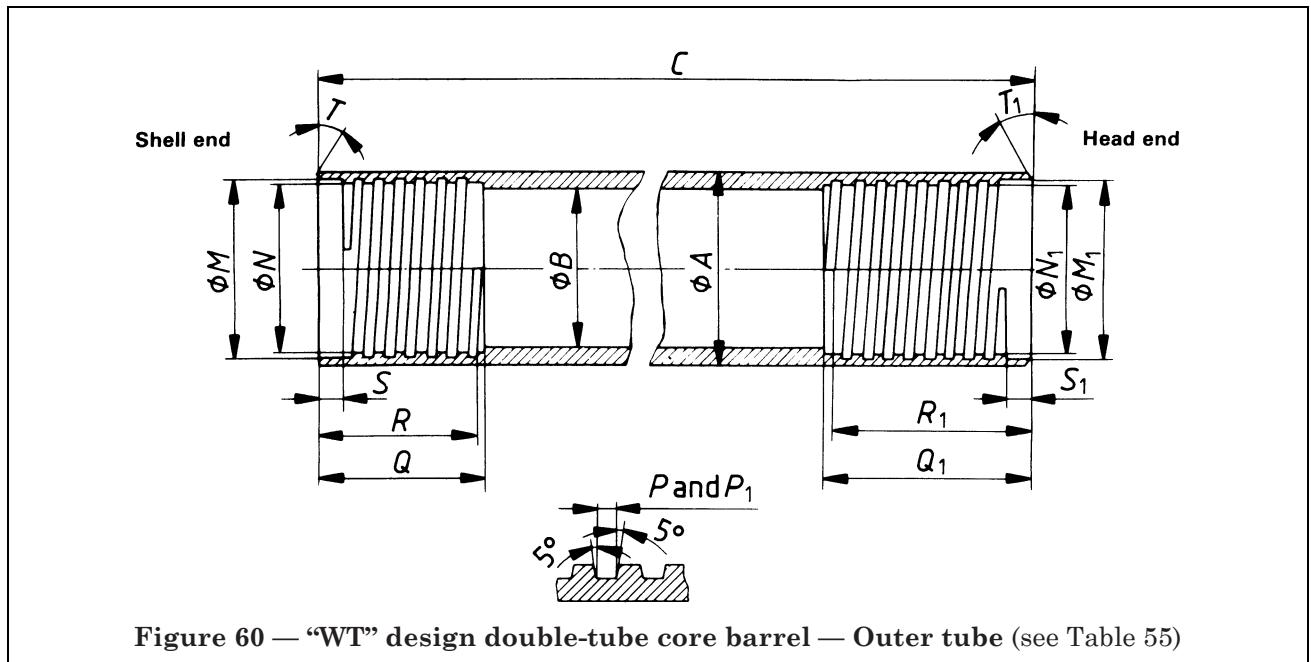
“WT” design double-tube core barrel — Outer tube (see Table 55)
